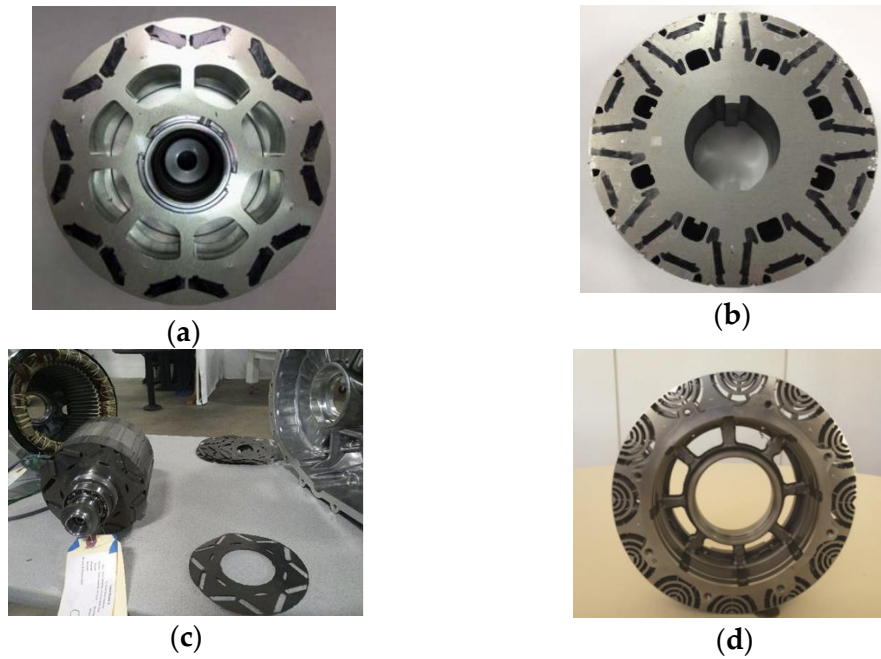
Rotor design of the interior permanent magnet (IPM) machine of production traction motors: (a) 2010 Prius [7] V-shaped rotor; (b) 2017 Prius double U rotor [8]. (c) 2017 Tesla Model 3 IPM V rotor [13], (d) 2016 Chevy Volt IPM rotor [22].
